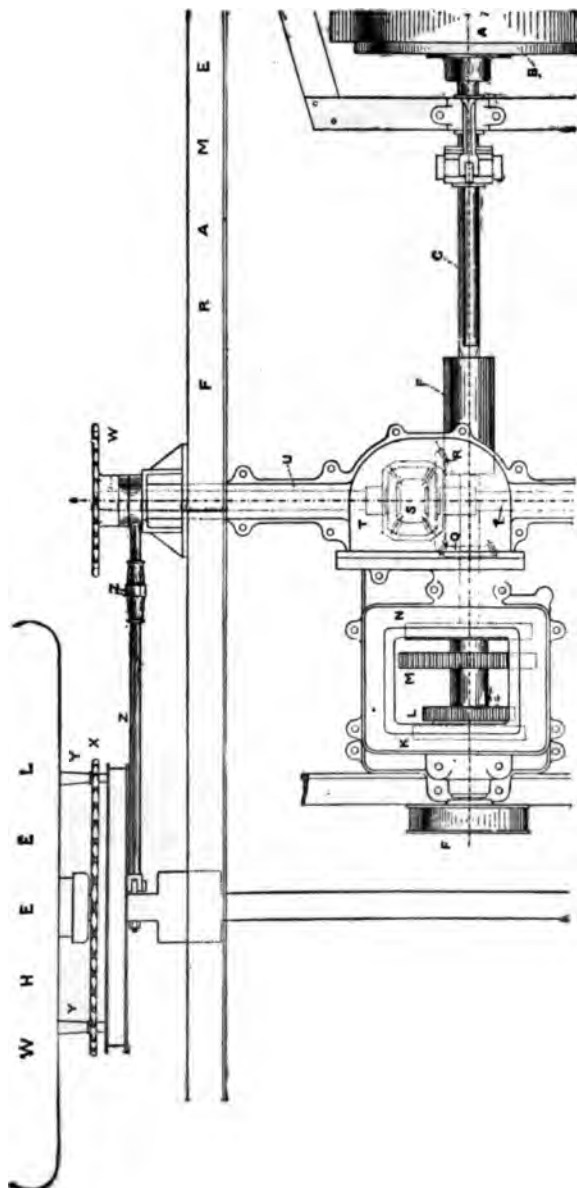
Daimler Co.'s Transmission Gear. Plan
